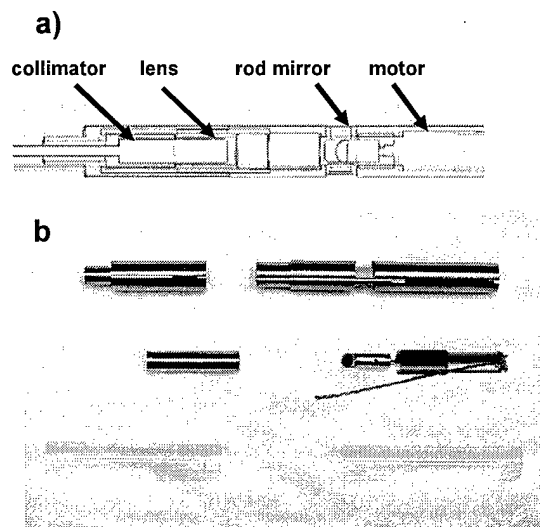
Schematic and photograph of the micromotor catheter assembly and components. (a) Wireframe cutaway with fiber collimator, focusing lens, rod mirror, and micromotor enclosed in housing. (b) Stainless steel housing and catheter components photographed before assembly. The micromotor is shown with the rod lens attached.
